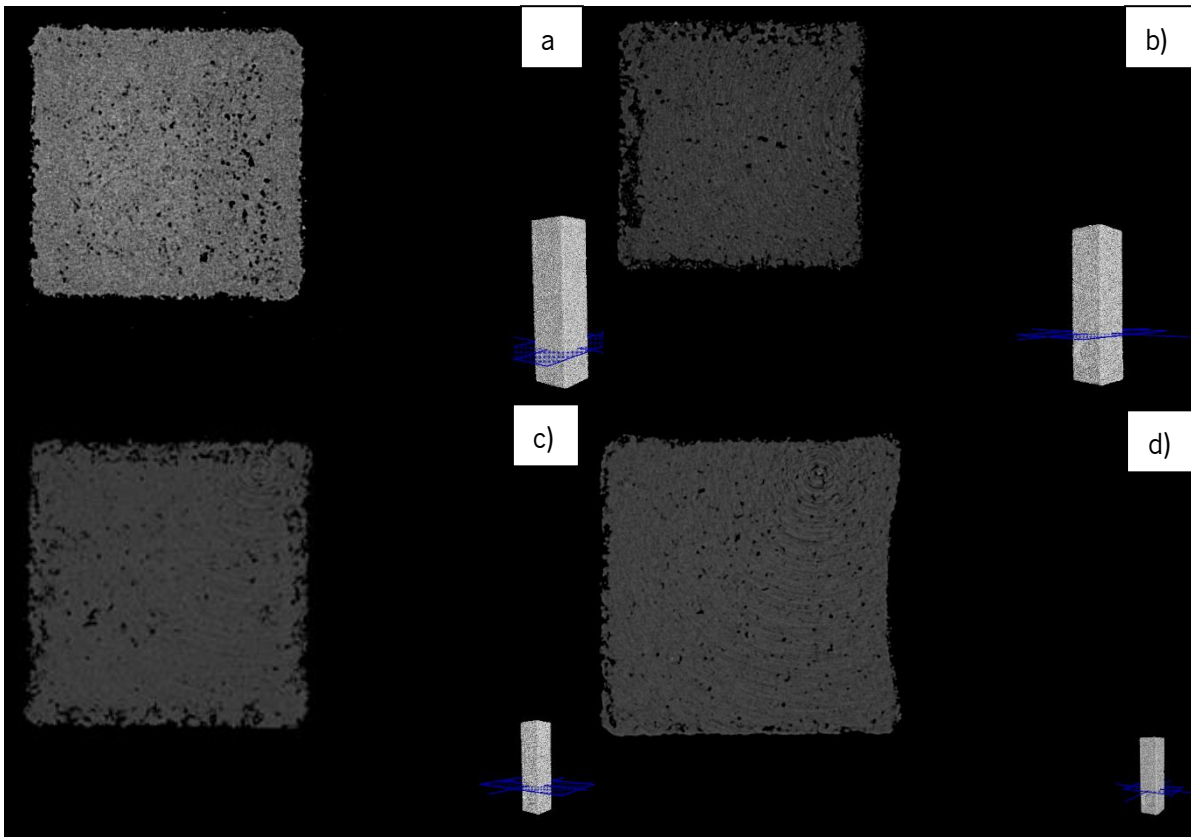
Longitudinal cuts made for the center sample at 5mm from the base for; a) print 1; b) print 4; c) print 8; d) print 12.
